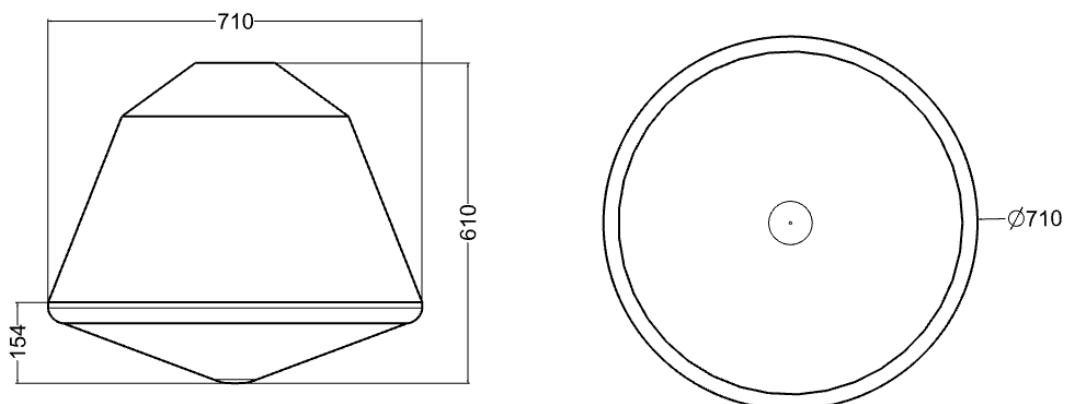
Dimensioned CAD draft of the Telos-1 aeroshell and PICA heat shield
